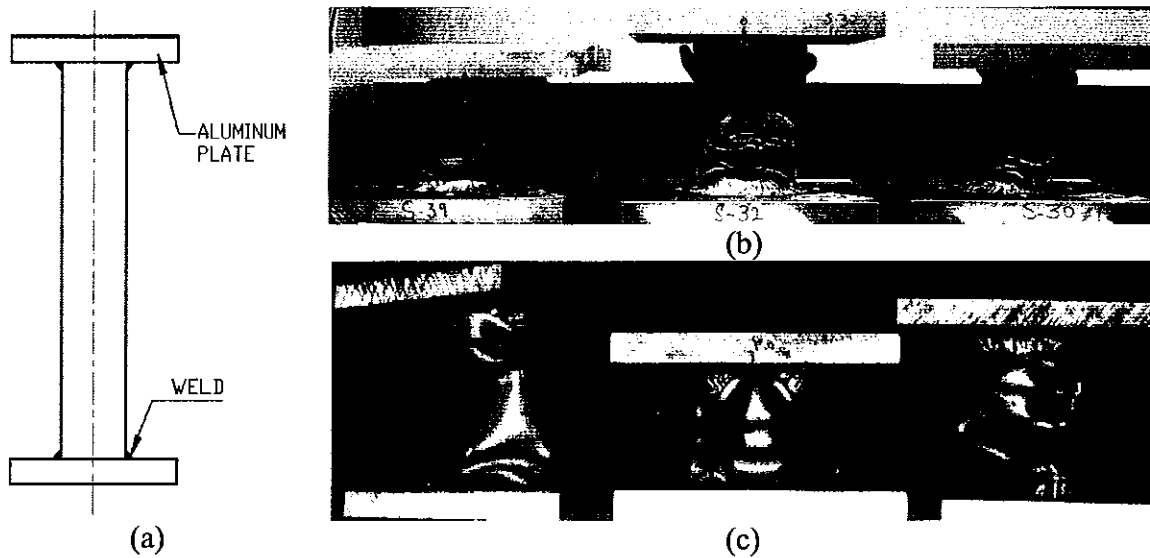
(a) schematic of the original tubes with aluminium plates welded at the two ends, (b) and (c) sets of axially crushed 2 and 3.5 mm thick tubes, respectively.
